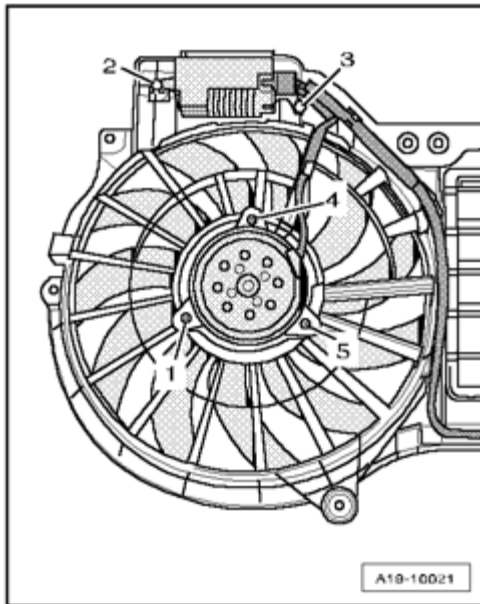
Removing Bolts & Coolant Fan With Control Module
